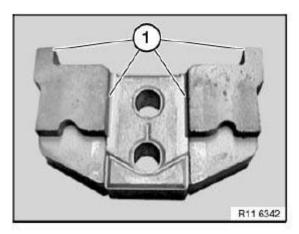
Identifying Contact Surfaces Of Guide Block Courtesy of BMW OF NORTH AMERICA, INC.
